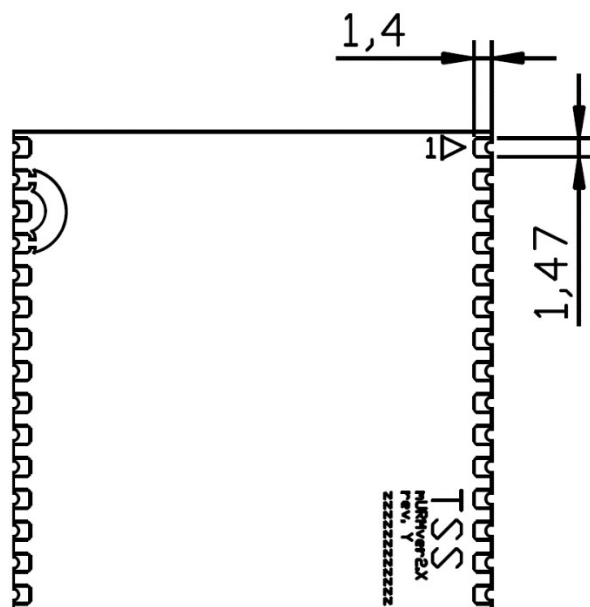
mURM ver. 2.0 dimensions (bottom view)
